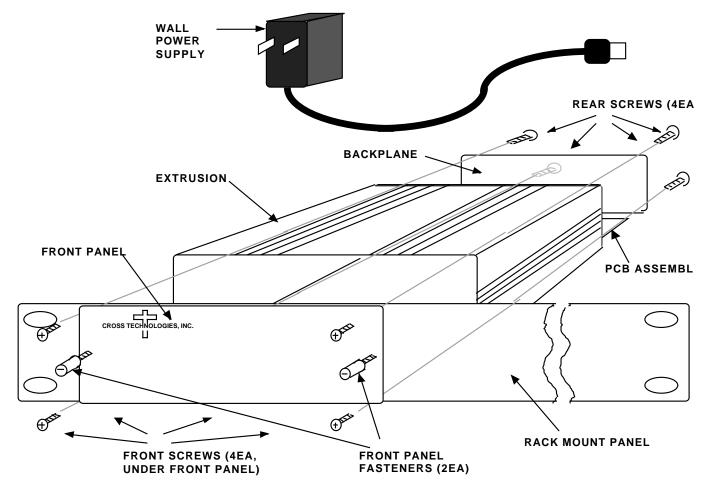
SERIES 2700 ASSEMBLY DRAWING
